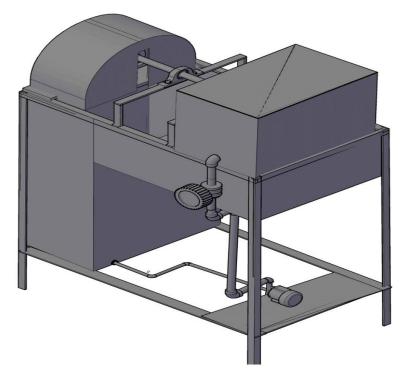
(3-D) Isometric drawing of the Front view of the Pelton wheel impulse turbine
